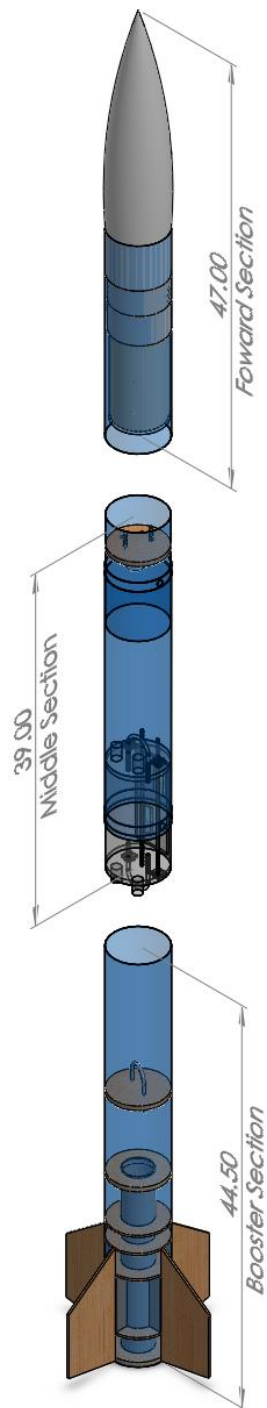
shows an exploded isometric view of the launch vehicle with transparent subsections.
